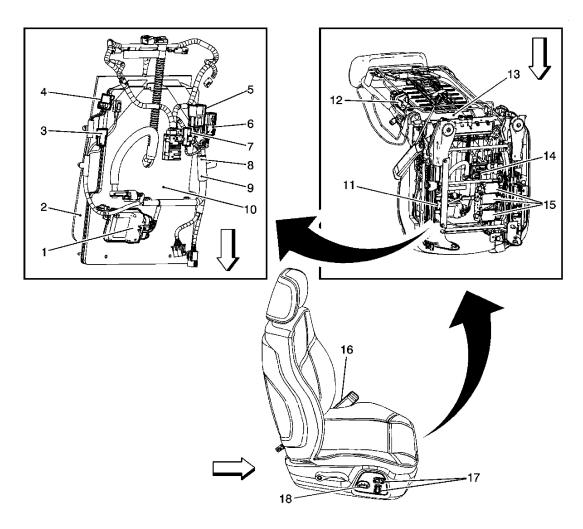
Identifying Passenger Seat Components Courtesy of GENERAL MOTORS CORP.
